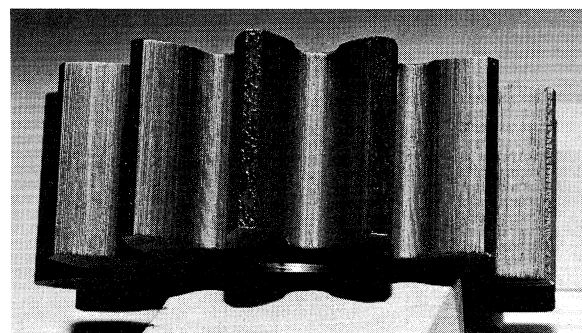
Shaper-cut finish of left-hand gear in Fig. 5-8 as produced with the cutter making 121 strokes per minute and feeding at a rate of 0.001-in. per stroke.
